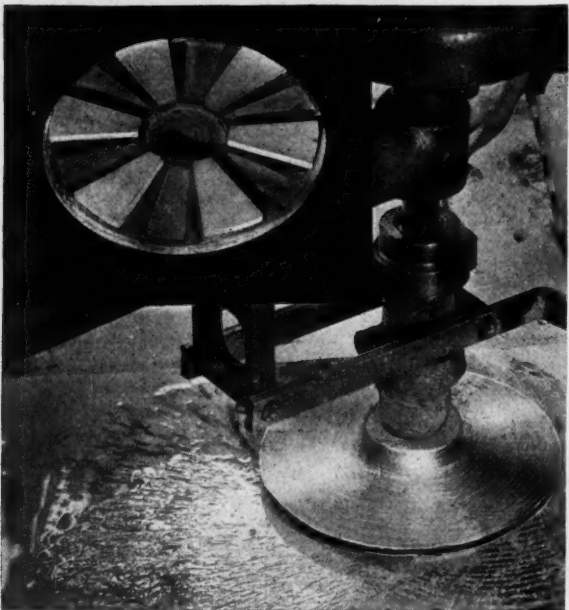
Planer with Grinding Attachment for Finishing Shoe and Wedge Faces on Driving Boxes.
